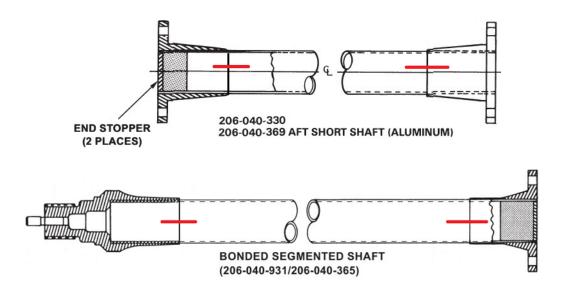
Example of Tail Rotor Driveshaft Numbering and Index Marking
